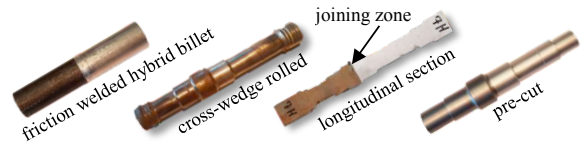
Process chain of shaft 3 made of aluminium and steel.
